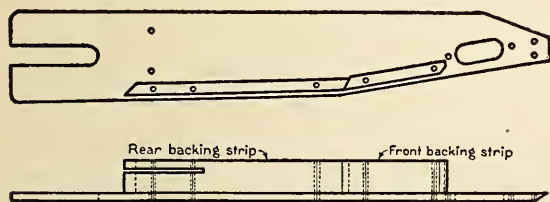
Special backing strips in place on special chain board, Case-Osborne corn binder
